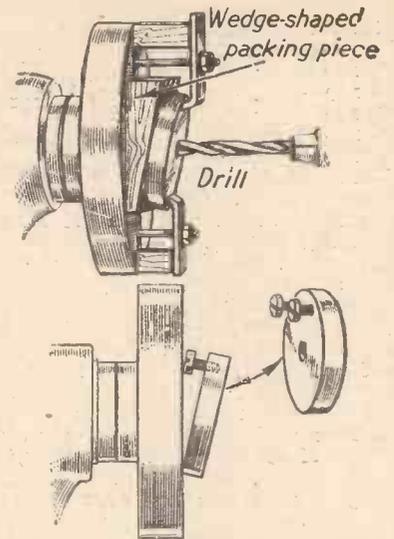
For drilling holes at an angle it may be necessary to pack the work as shown here.
